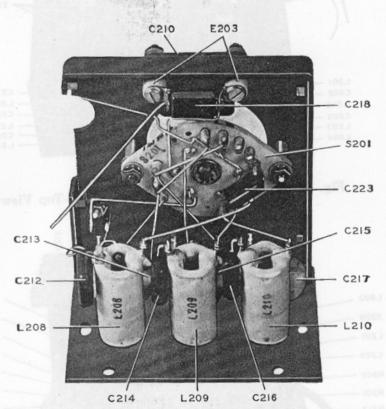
Receiver Oscillator Tank Assembly—Side View
